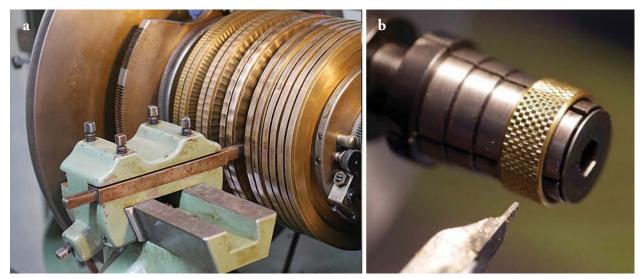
Rubber engaged with the rosette; 16b. A ring made using the chisel technique (Courtesy of Brittany N. Cox)
